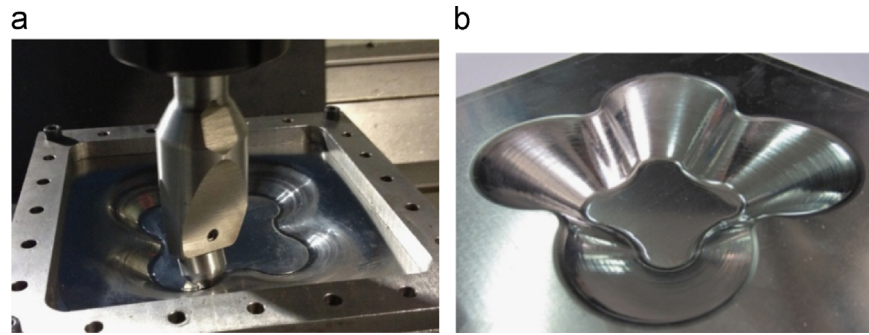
A flower shape part processed by oblique tool. (a) Forming process and (b) finished part.
